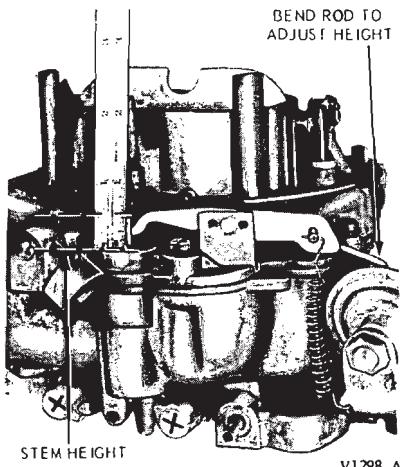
Accelerating Pump Piston Stem Height and Pump Stroke
